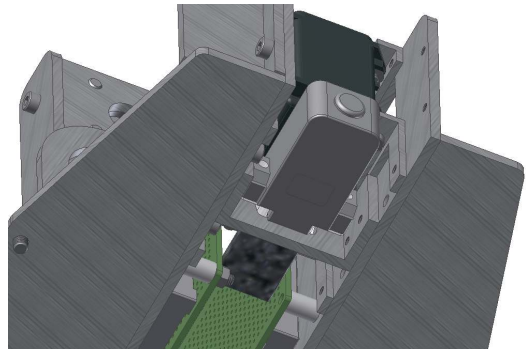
Assembly of a USB-3WAY and a connection cable for Dynamixel DX/RX servomotors.
